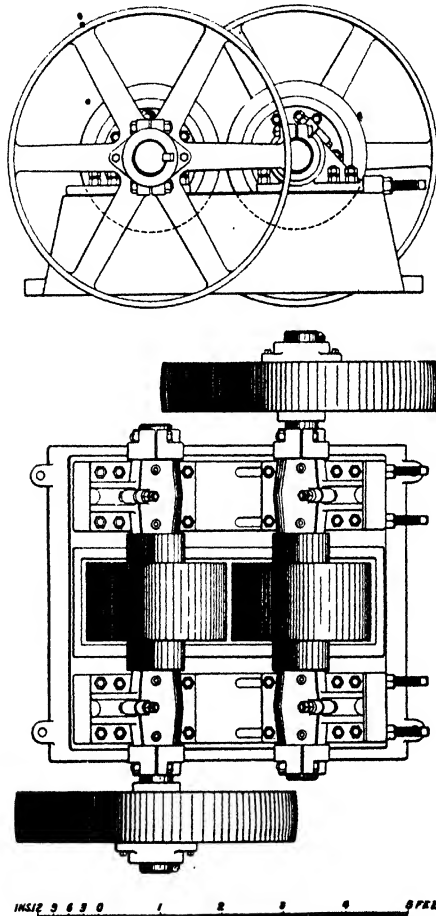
Rolls with rigid bearings. Plan and elevation.
